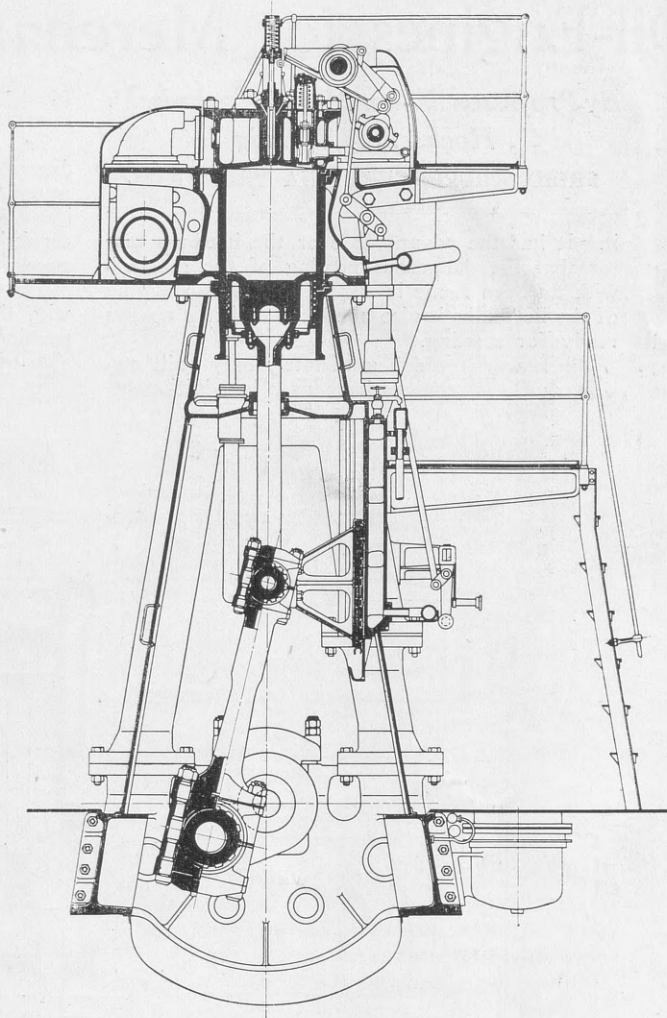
Sections through cylinder of Goerlitz 1,000 b.h.p. marine engine
